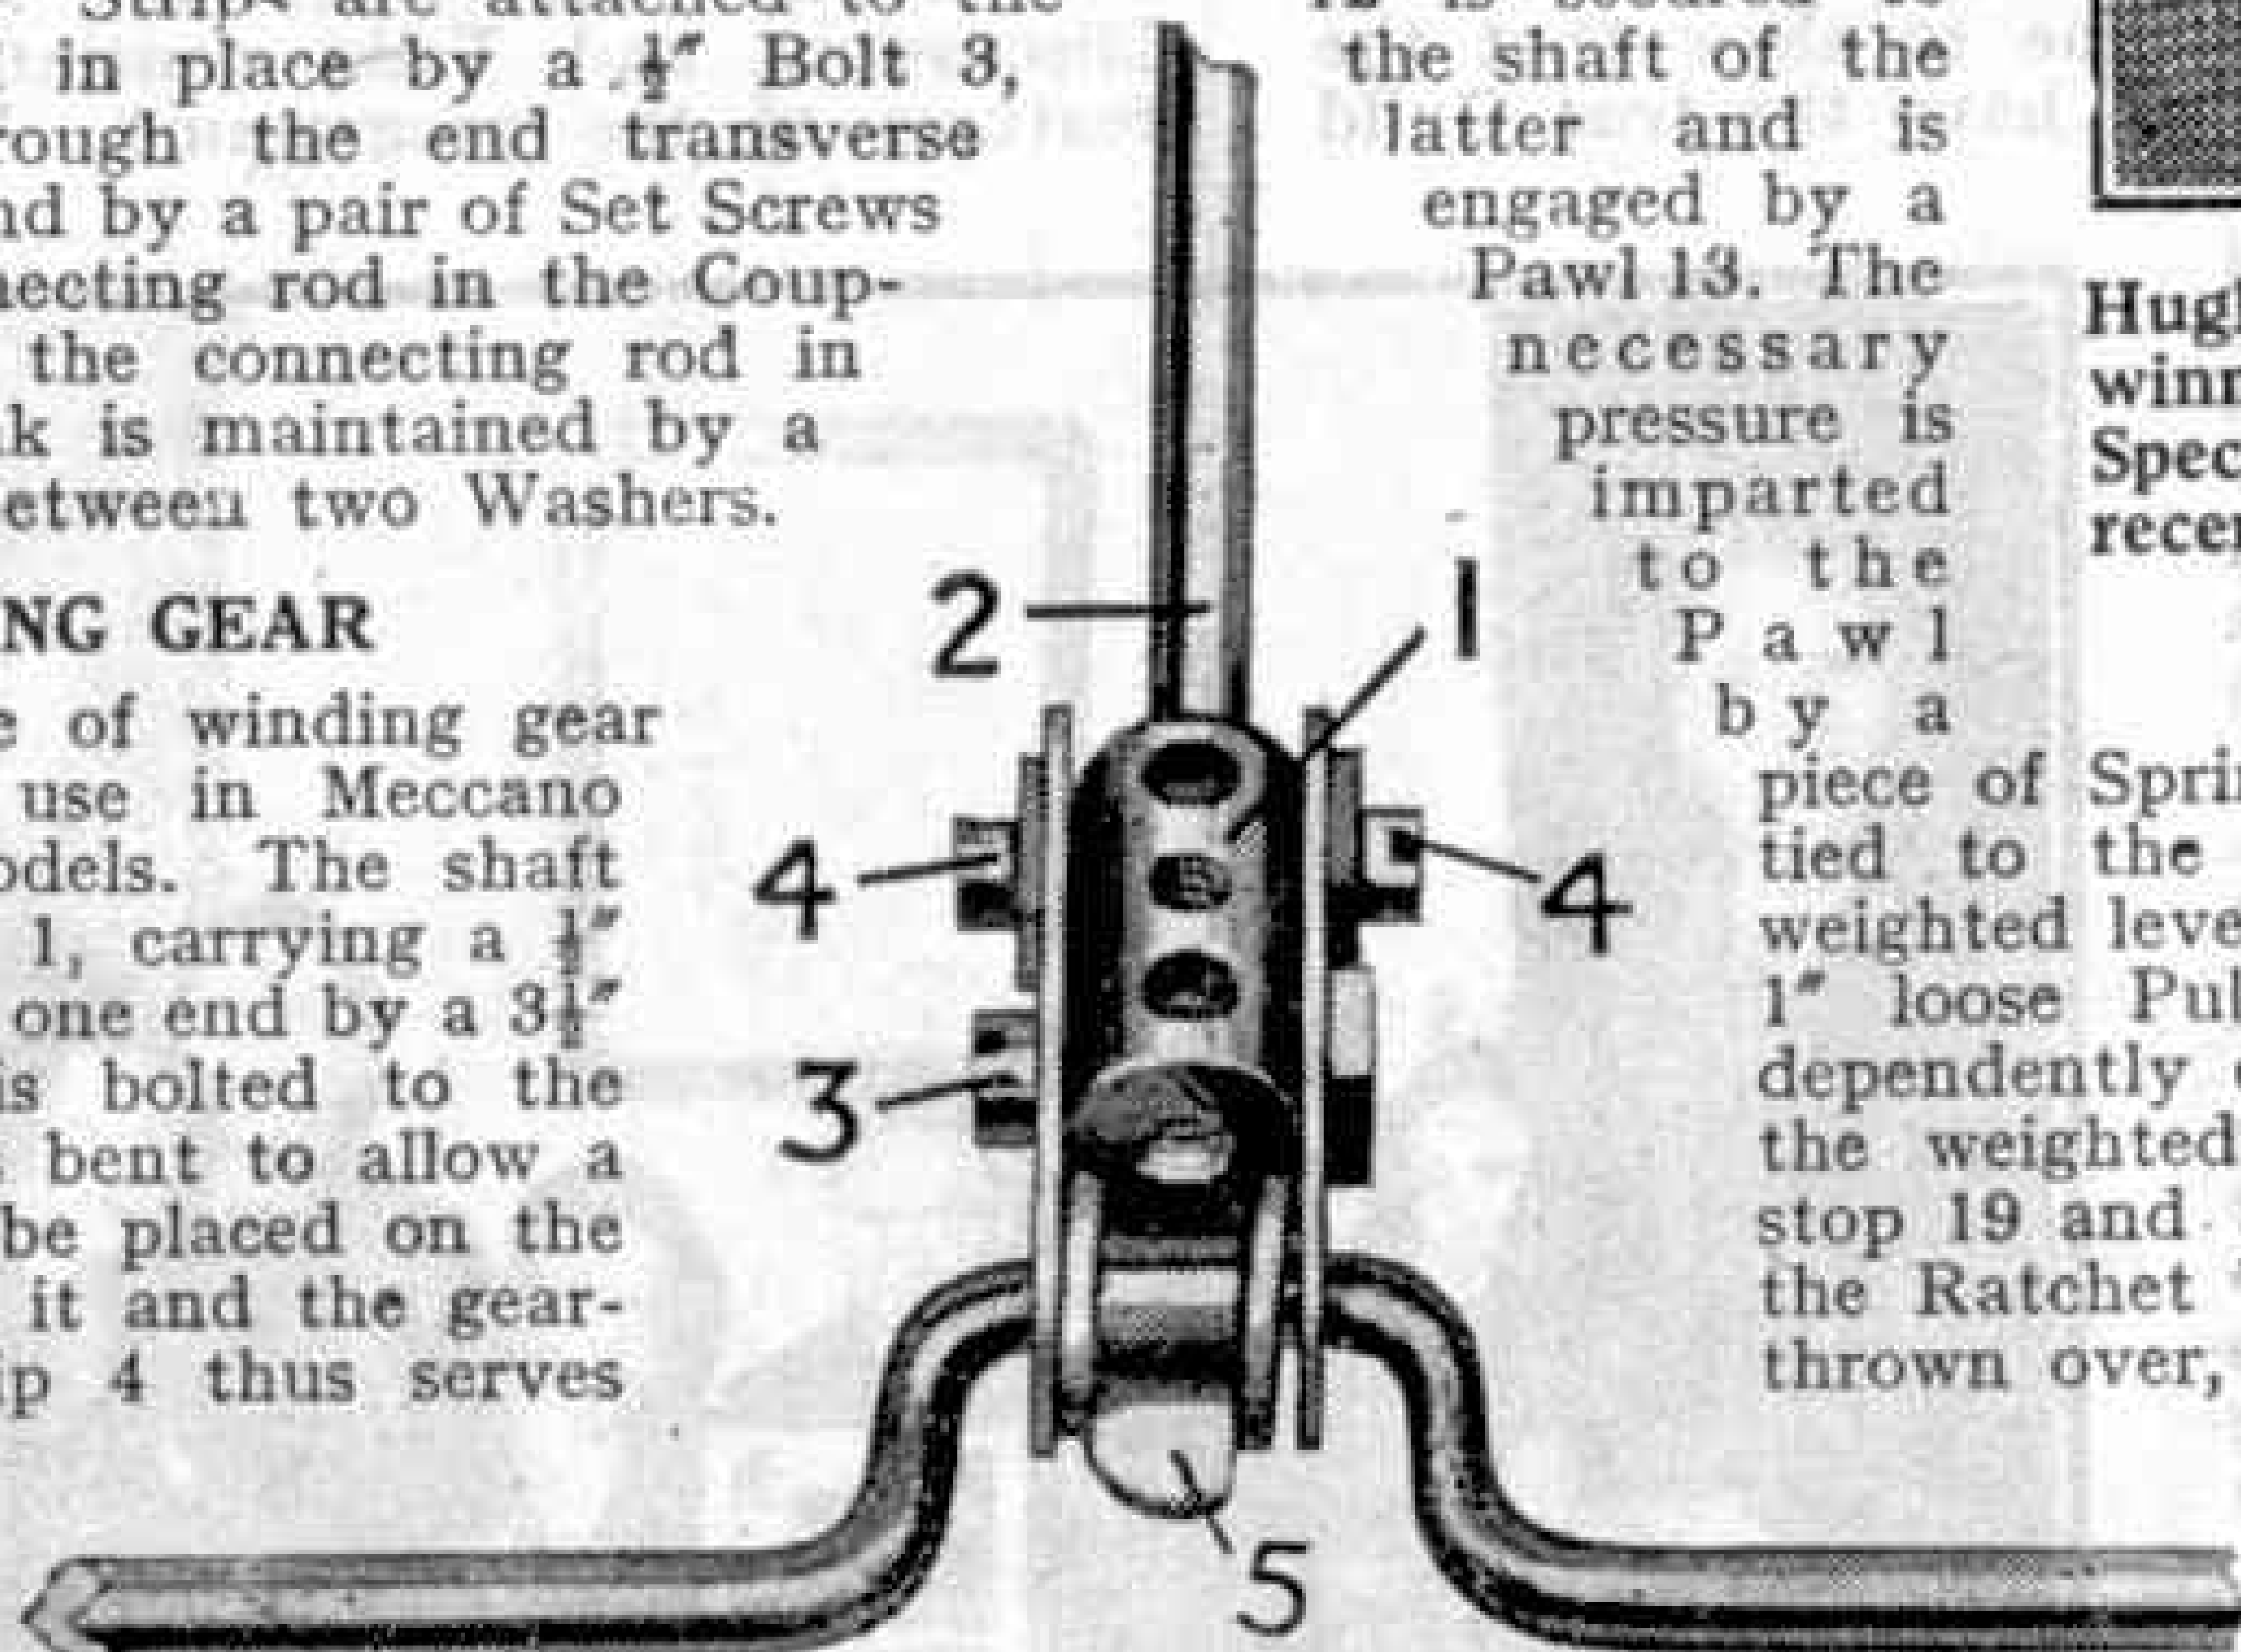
A simple method of building a connecting rod "big-end" for use with the Meccano Crankshaft.
